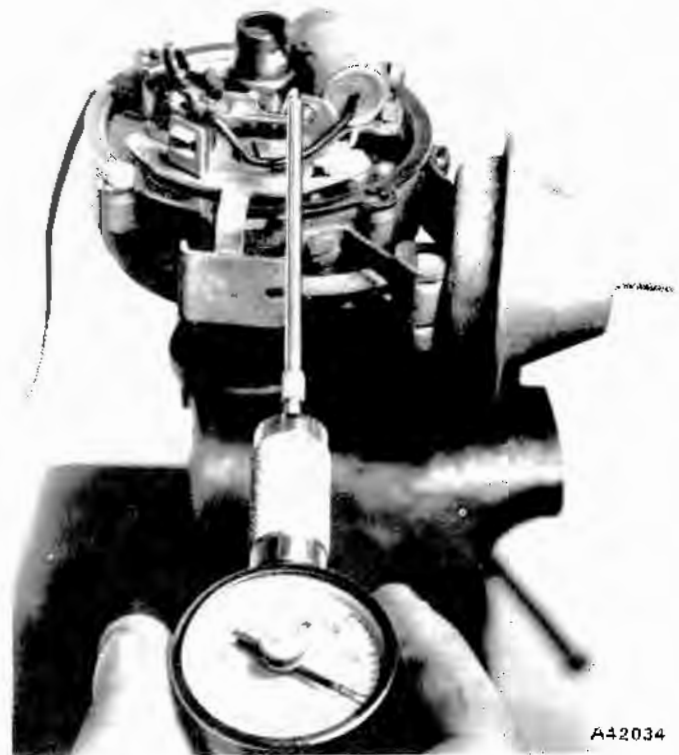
A-44 Breaker Arm Spring Tension - Six-Cylinder Shown
